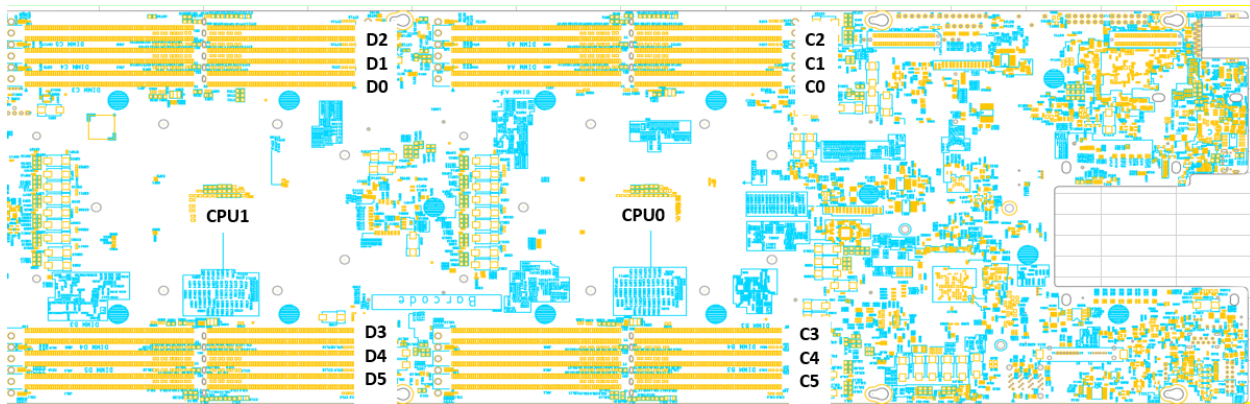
DIMM Numbering Silkscreen Bottom side
